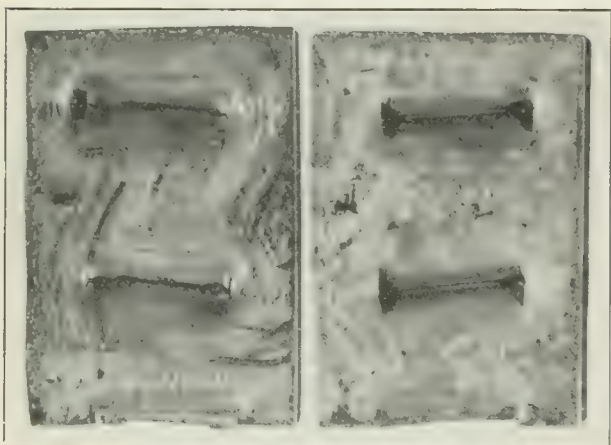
The Outside and Inside of a Section of Well Casing with the Ordinary Cracked Perforations
